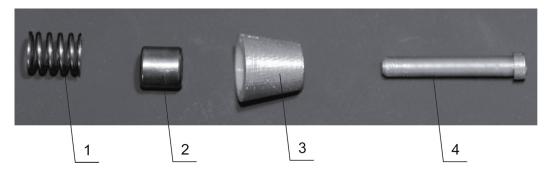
The rotary tooth of demonstrator; 1 – spring, 2 – rolling bearing, 3 – body of tooth, 4 – mandrel
